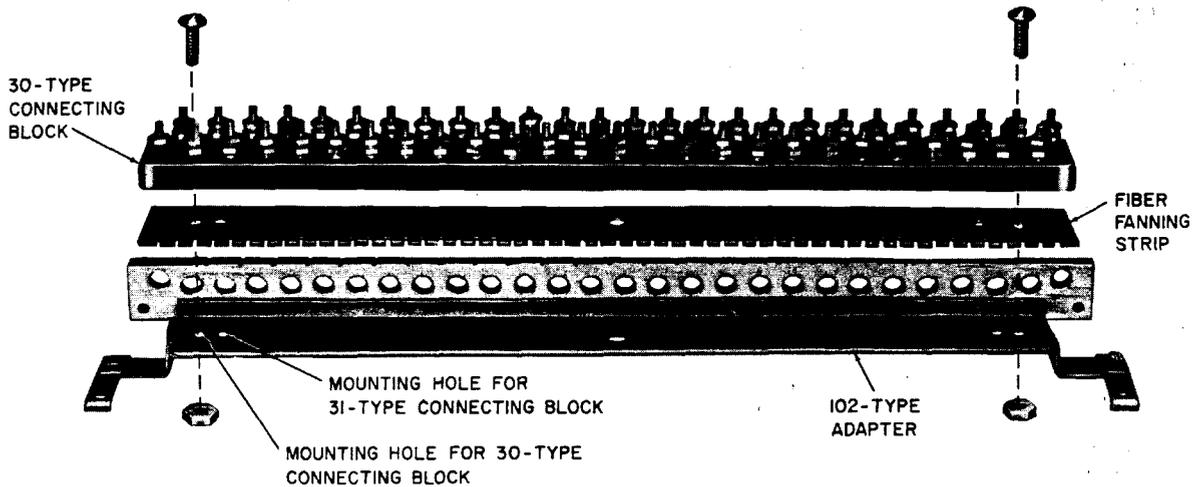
Assembly of Connecting Block, Fanning Strip, and Adapter
